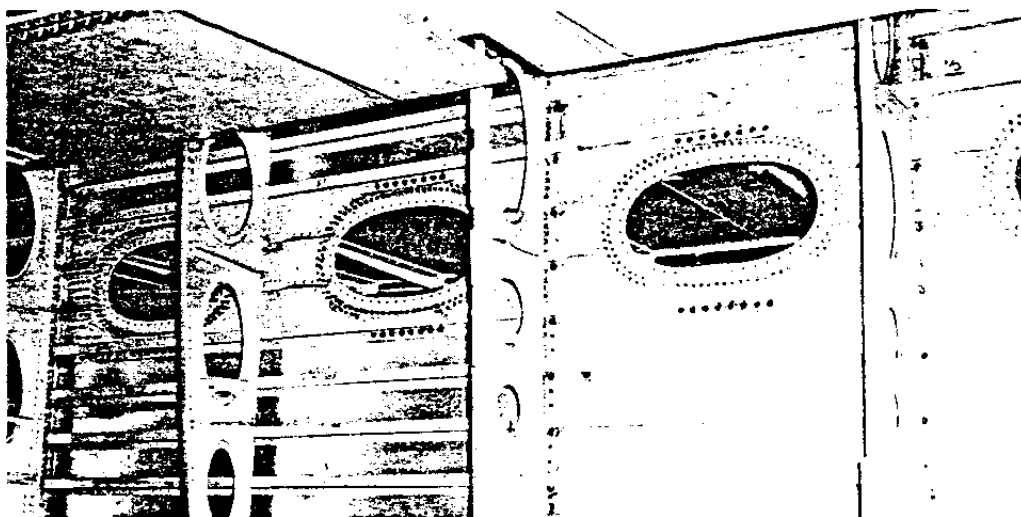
Rib Type Used in Outer Panel-Fuel Tank Section- of Douglas DC-8 Commercial Jet Airliner.
